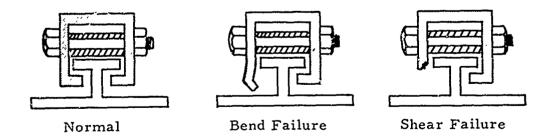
SEAT TRACK ATTACHMENT FAILURES
